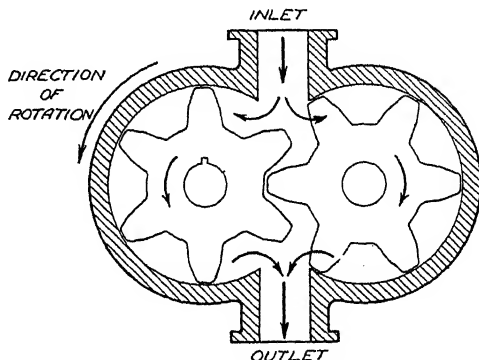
SPUR-GEAR OIL PRESSURE PUMP.
